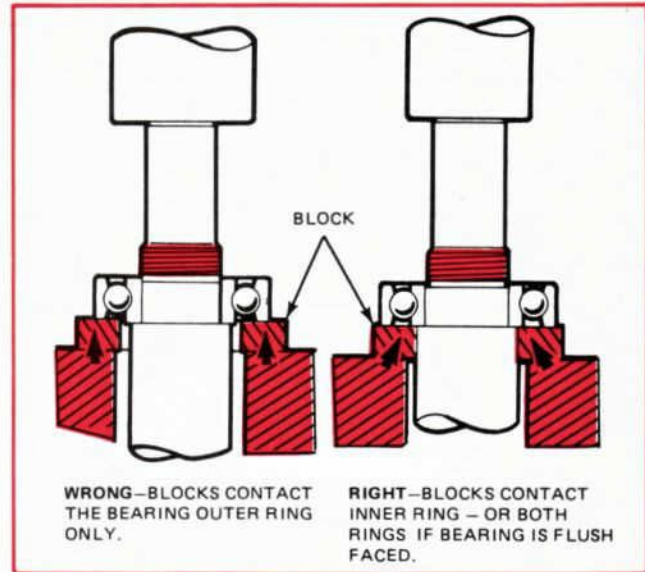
Right and wrong places to exert pressure to press bearing off of shaft.
